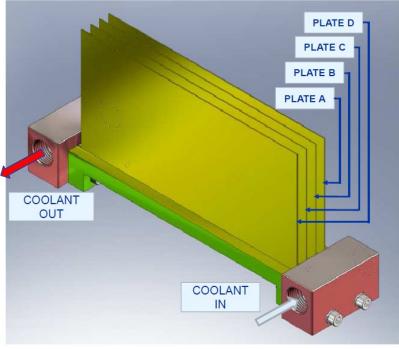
Single-sided anodized aluminum heat exchanger with fuel cell cooling plates.
